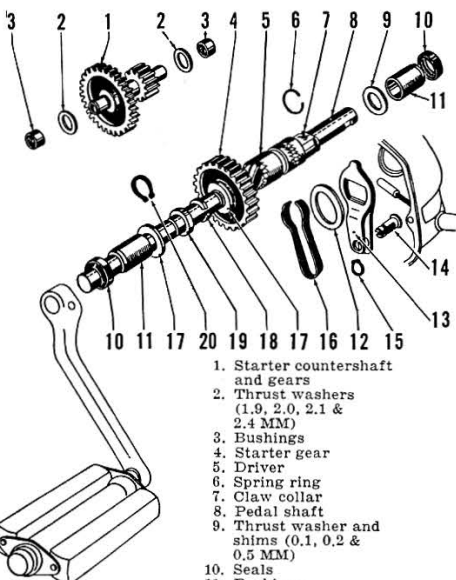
View of Mo-Ped starting and pedaling assembly.
